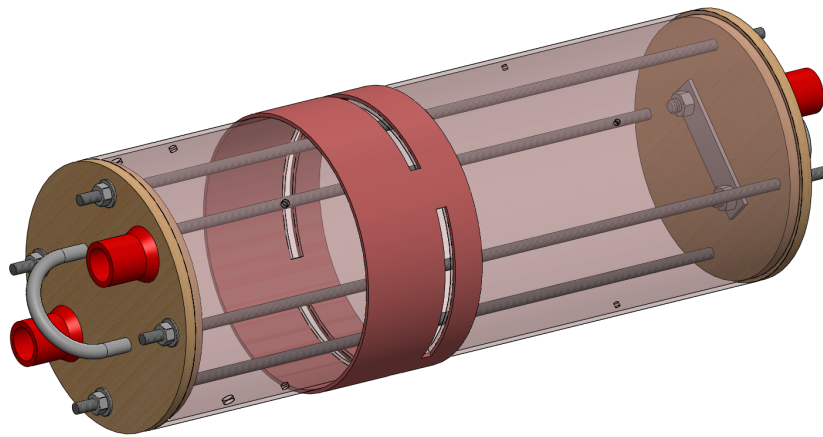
AVAB section without internal AV Bay or Air Brakes assembly.
